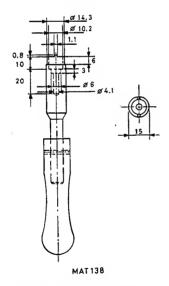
Dimensional drawing of tool for BNC input sockets.
